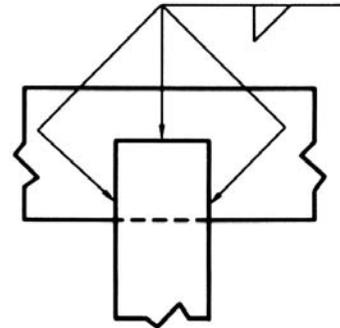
Weld Joint Designs (continued)
